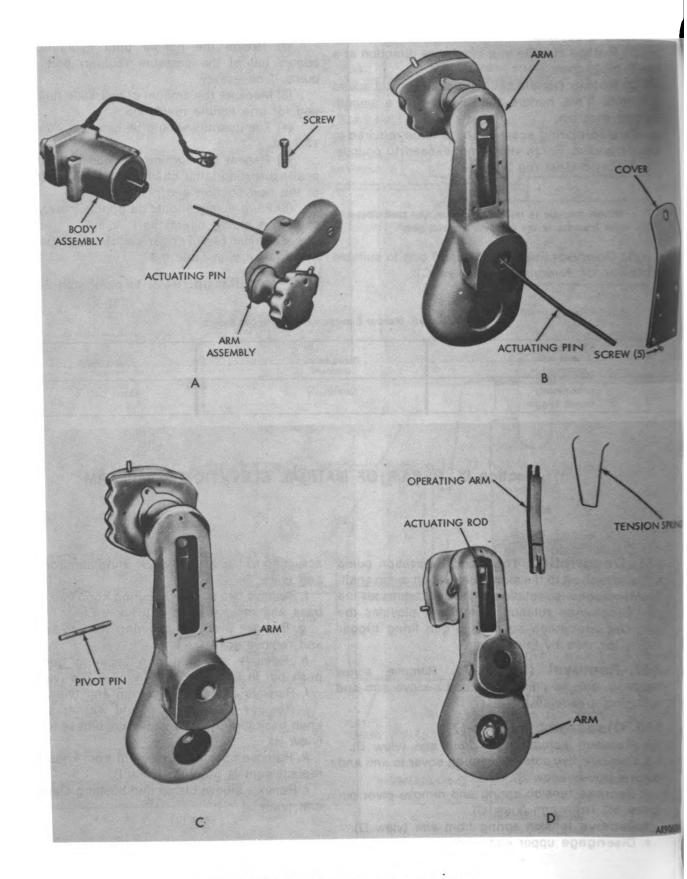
Manual elevation pump arm removal, disassembly, or assembly (1 of 3).
